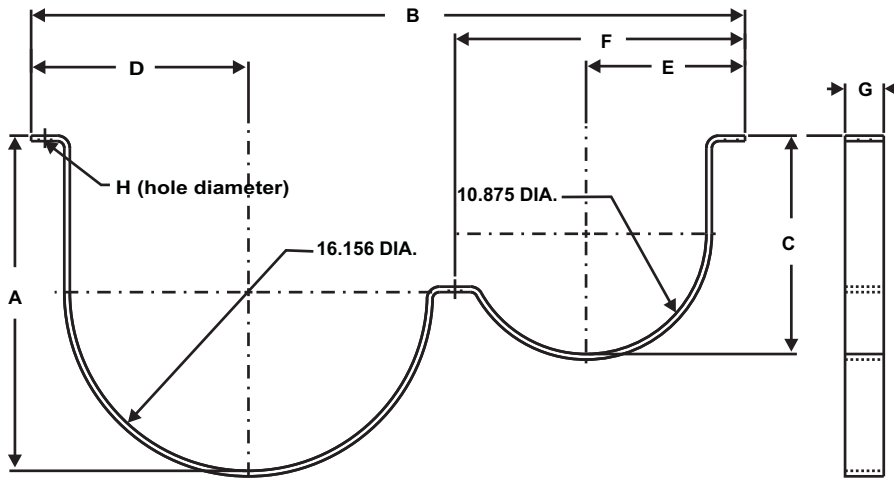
Dimensions for 395-lb. System (P/N 06-236126-001)
